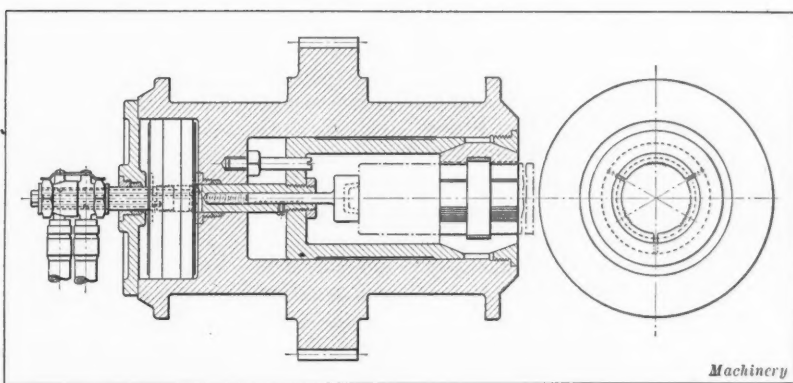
Spindle of Cutting-off Machine and other Machines of this Type
